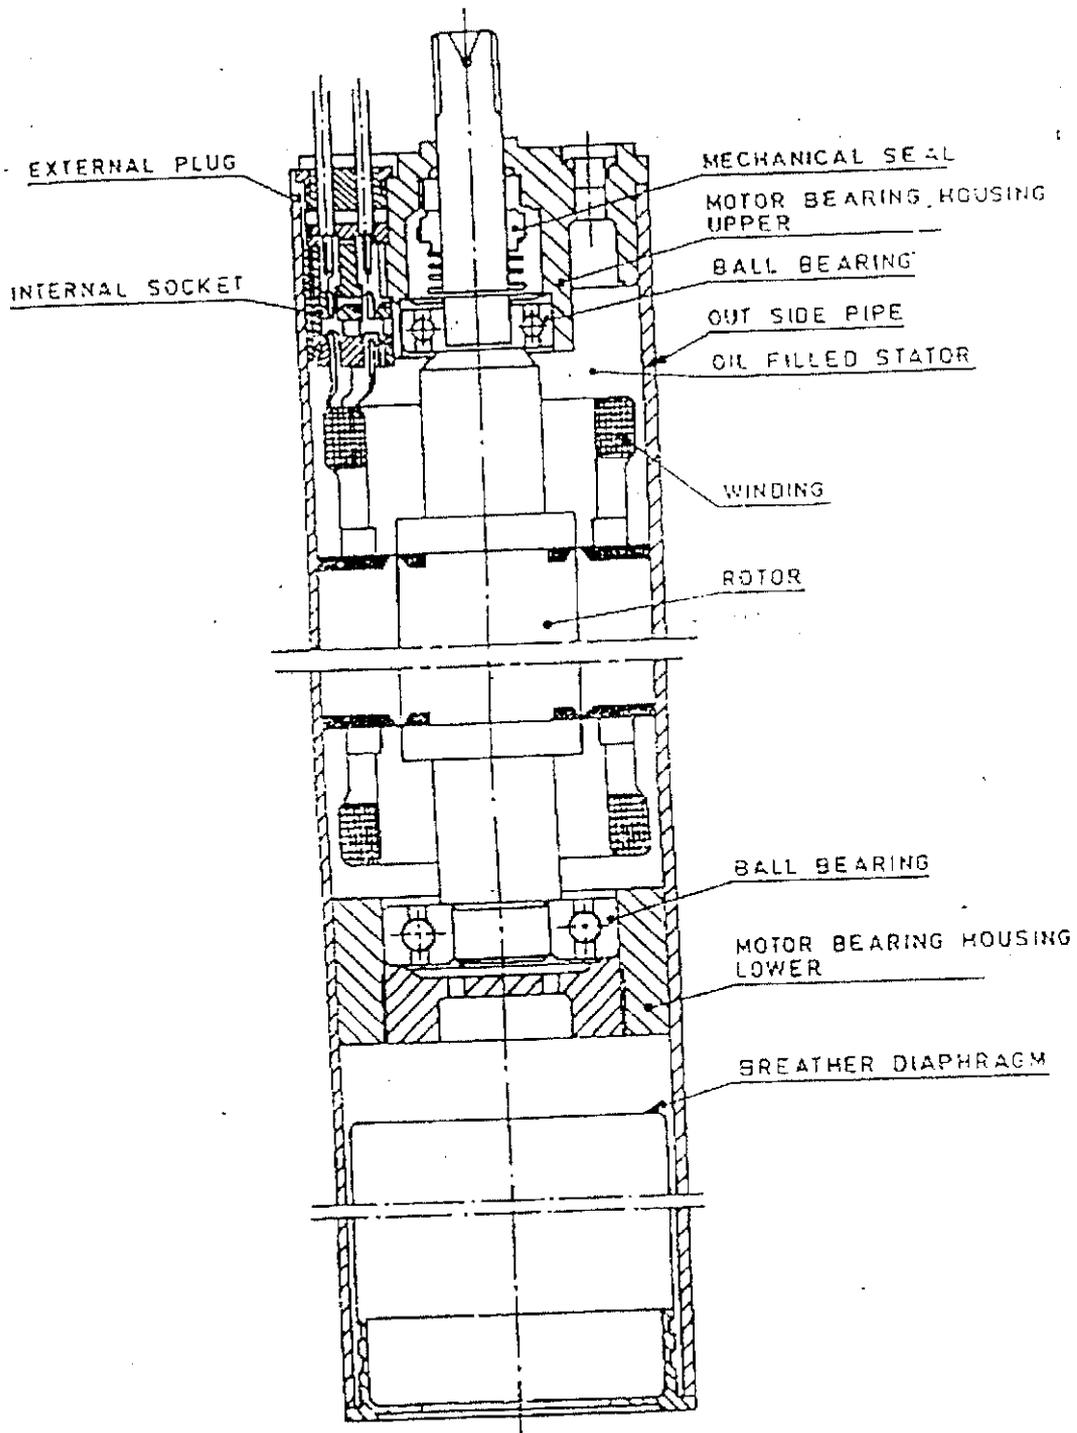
WET TYPE OIL FILLED MOTOR
